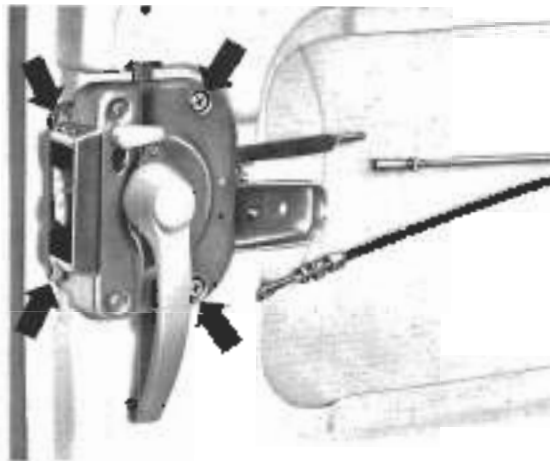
Lock removal (from 1971). Disconnect cable and rod, then take out the screws (arrows).
